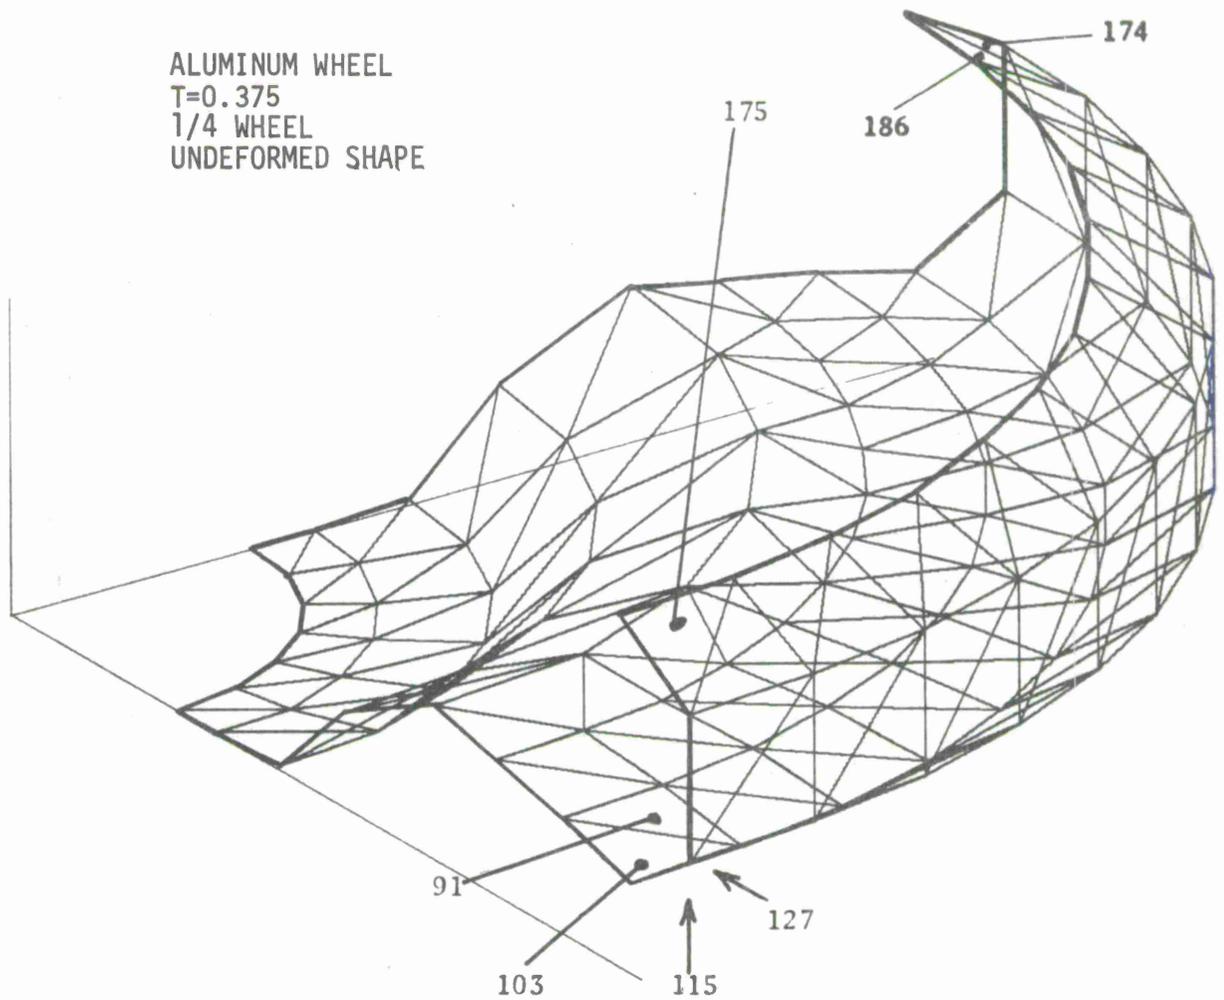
Undeformed shape of the M113 aluminum road wheel.
